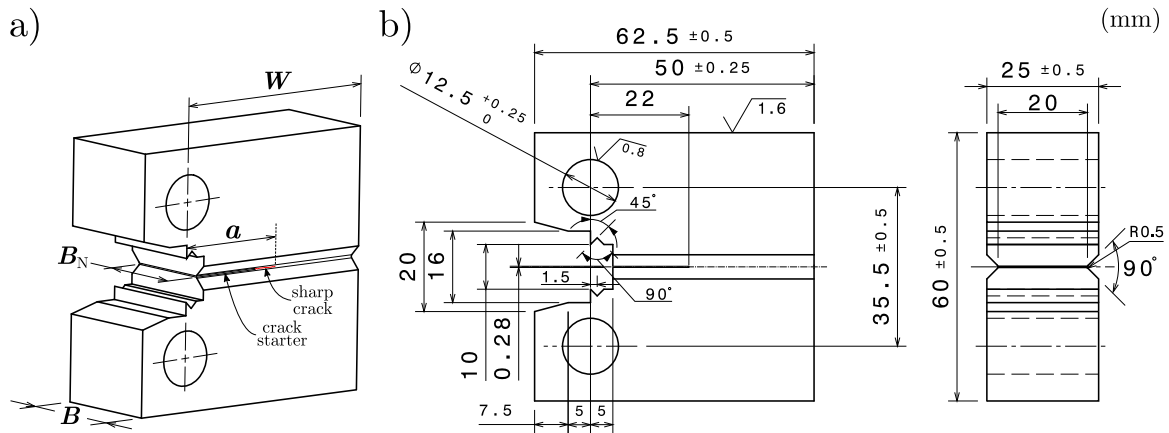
Compact tension, CT, specimen used for fracture toughness and warm pre-stressing testing. (a) Three dimensional view showing the parameters W , B , B_N , and a . (b) Detailed drawing. The crack starter was manufactured, while the sharp crack was introduced by the pre-cracking procedure.
